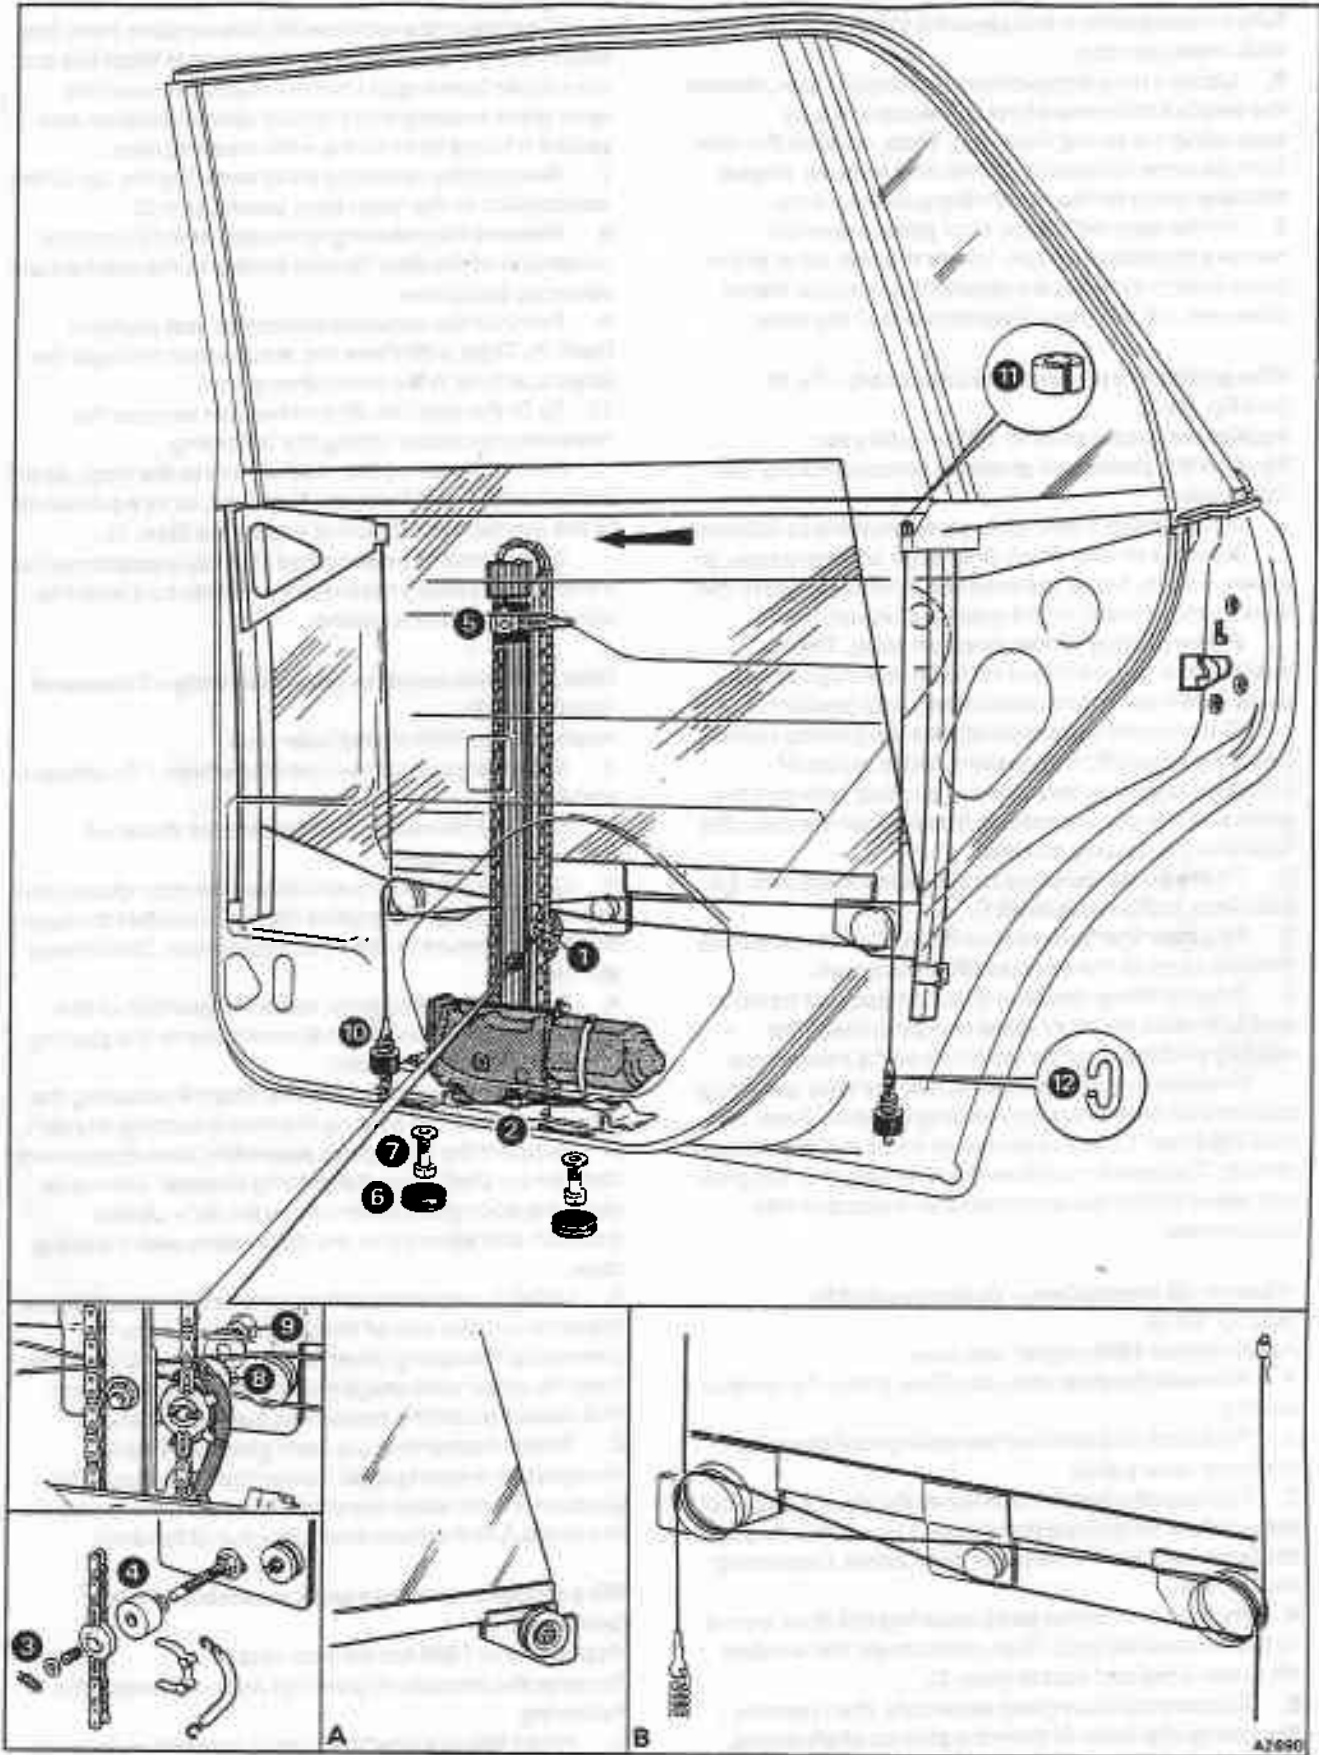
Window lift mechanism, door glass, and wire guidance assembly and fittings
